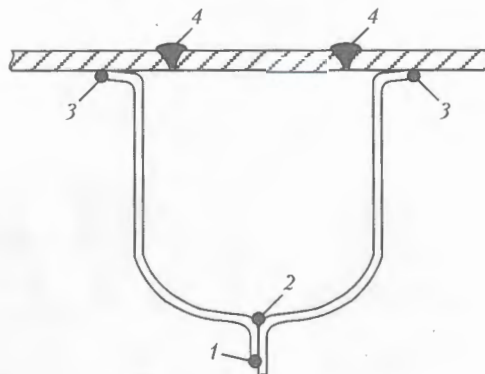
General layout of the DSB: 1 — three-layer weld formed under water in mechanized welding with self-shielded flux-cored wire; 2 — additional weld made after drying DSB by the electrodes UONII-13/45R; 3 — assembling fillet weld made on the building cradle in preparation of the DSB; 4 — multi-run butt weld made in dry conditions when joining bottom and board parts of the caisson super-blocks
